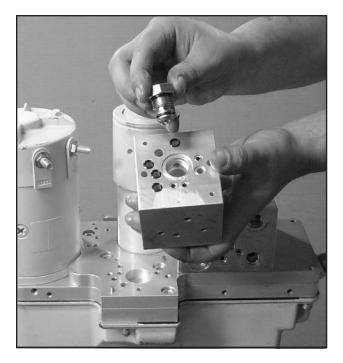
Replace the two o-rings and install Check Valve Assembly into the Universal Valve Block Assembly. Use a 15/16" socket to tighten the Check Valve Assembly.
